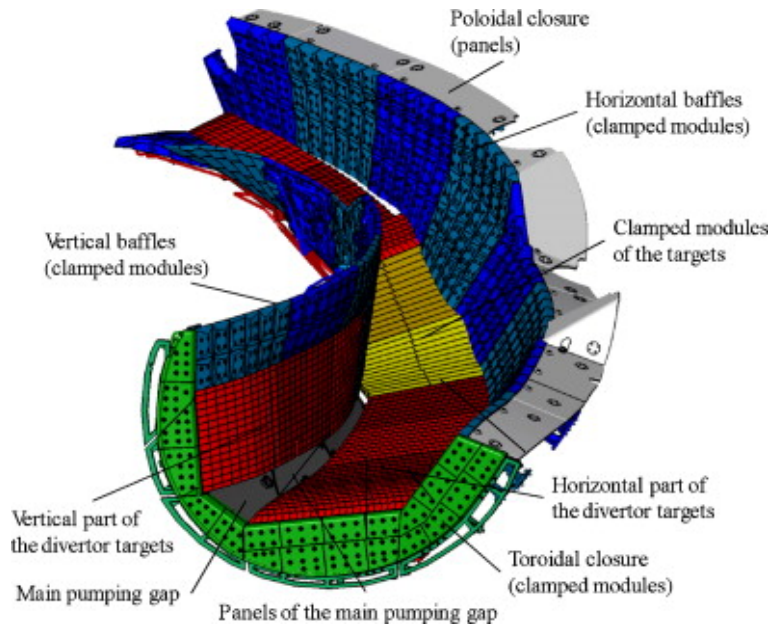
CAD drawing of a divertor module showing the different target plates, pumping gap, baffles and closures. Image taken from [34, Fig. 2].
